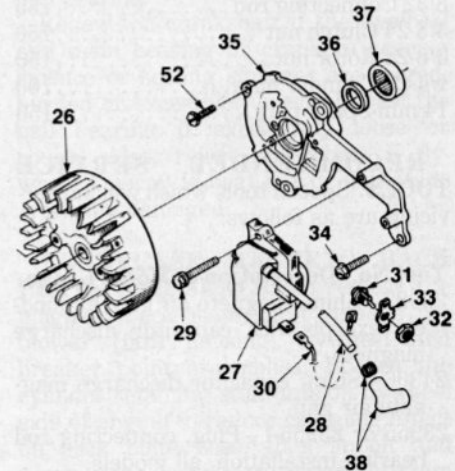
A—View of one-piece solid-state ignition used on later SXL-925 models.
